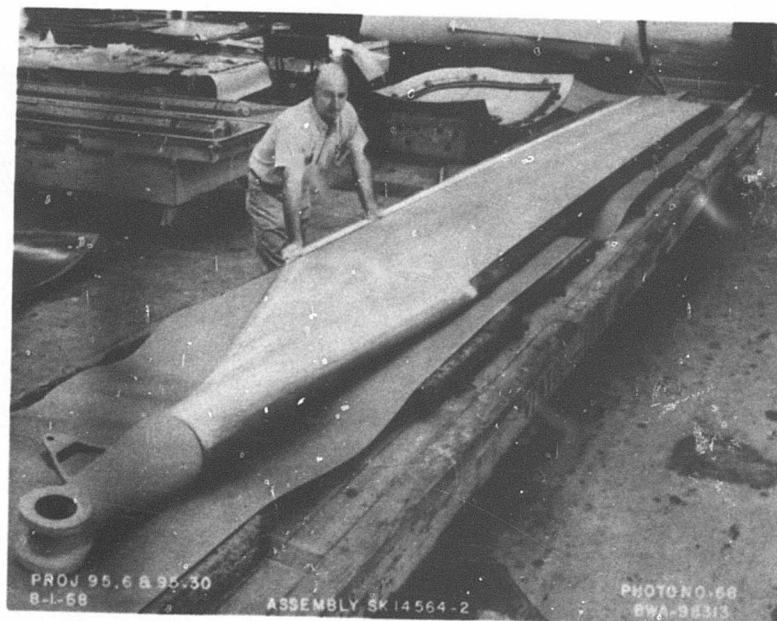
The Finished Advanced-Geometry Rotor Blade.
